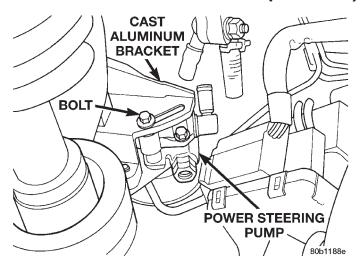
Power Steering Pump Attachment To Rear Mounting Bracket
